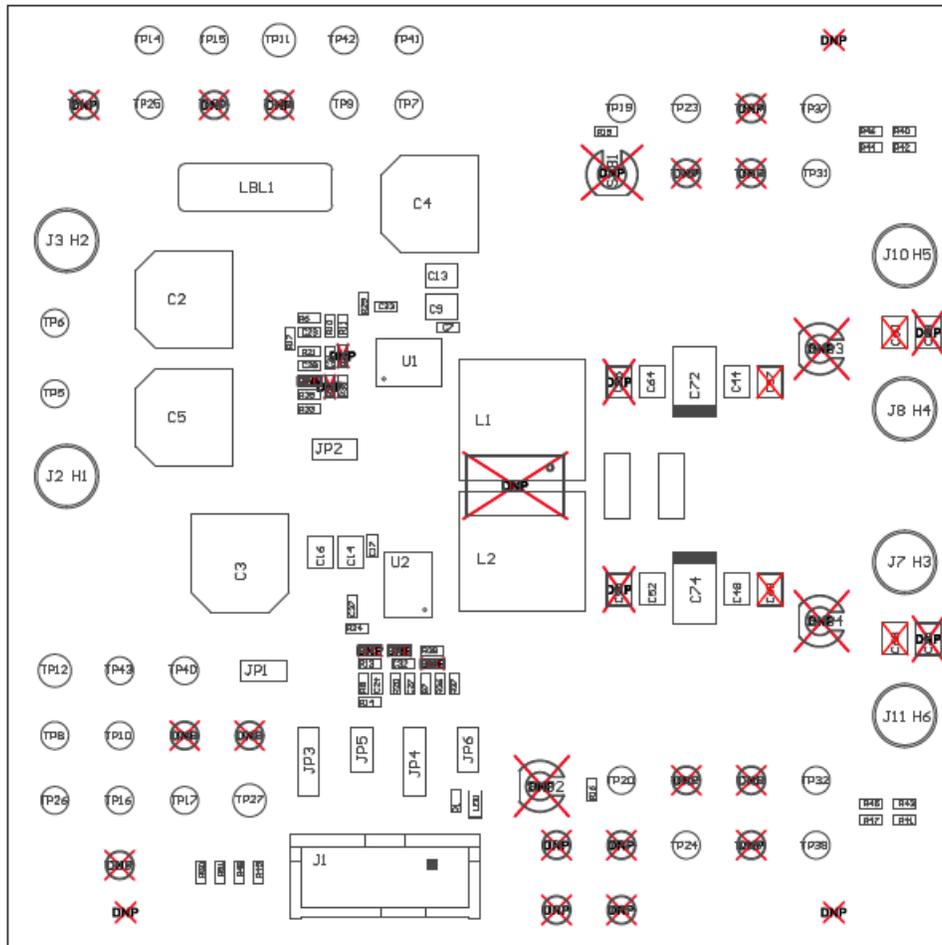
TPS546C20AEVM2-746 EVM Top Layer Assembly Drawing (Top View)
